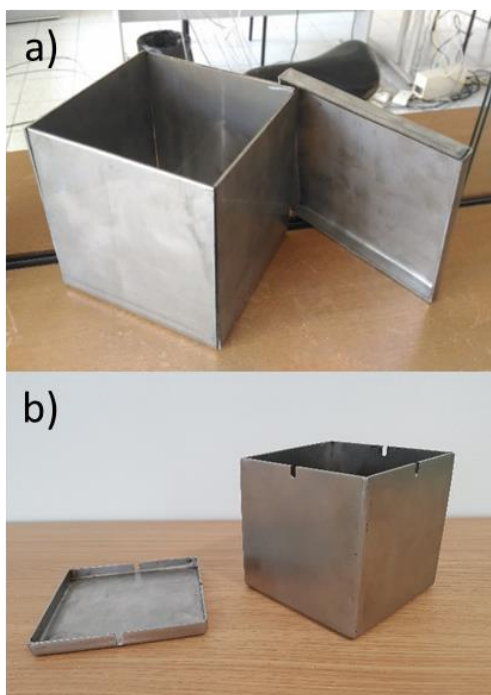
Photographs of the custom-made Faraday cage obtained by Nanopore Solutions that was used for RPS particle/cell studies. a) Shows the initial steel sheets (1 mm thickness) before welding and drilling of holes, and b) shows the finished Faraday cage (box and lid).
